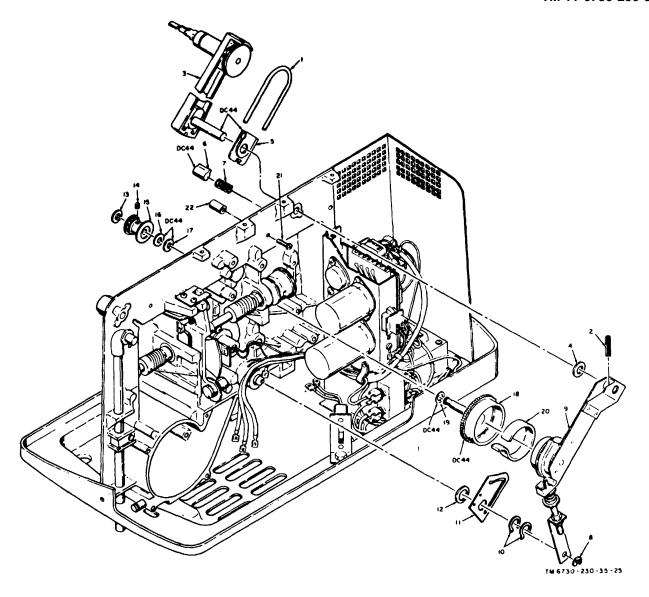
Takeup mechanism and reel arm, exploded view.
